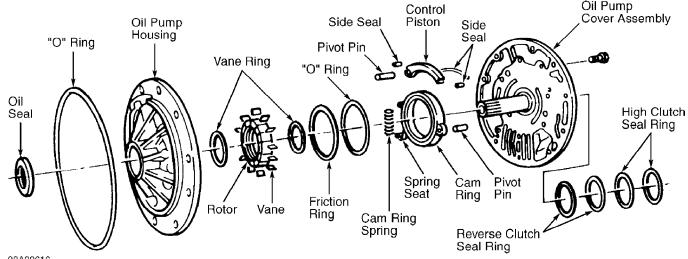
Exploded View Of Oil Pump Assembly Courtesy of Nissan Motor Co., U.S.A.
